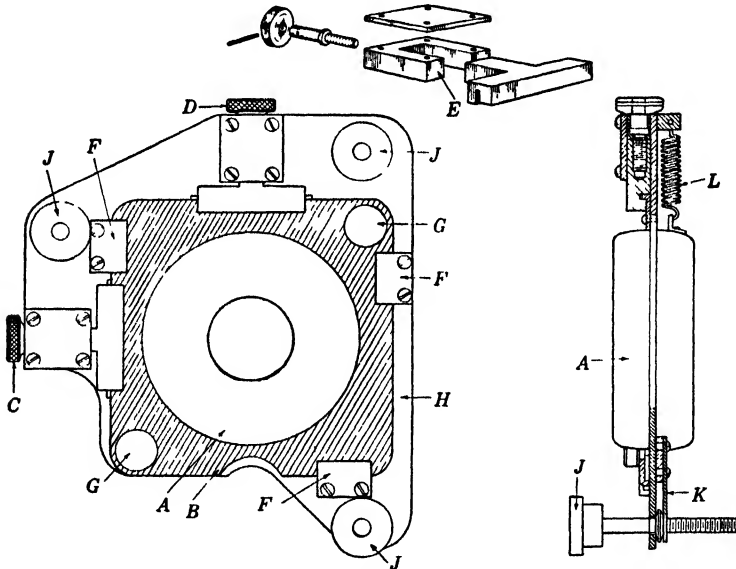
Adjustable support for focus coil. *A*, focus coil in case; *B*, sliding plate onto which focus coil is mounted; *C*, adjusting screw for horizontal motion of coil; *D*, adjusting screw for vertical motion of coil; *E*, detail of adjusting mechanism of *C* and *D*; *F*, retaining clamps for *B*; *G*, clamping screws for *B*; *H*, main plate; *J*, adjusting screws for tilting main plate to be threaded into fixed plate (not shown); *K*, spring clip support for *J*; *L*, tension spring (antibacklash).
